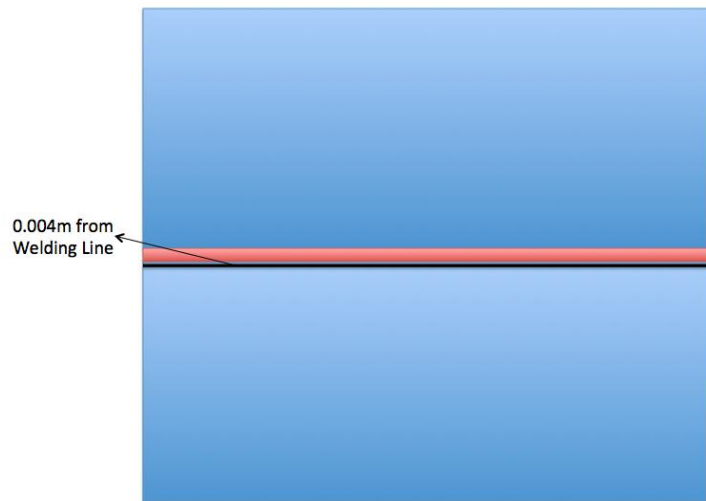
Schematic of location of 0.004m from welding line
